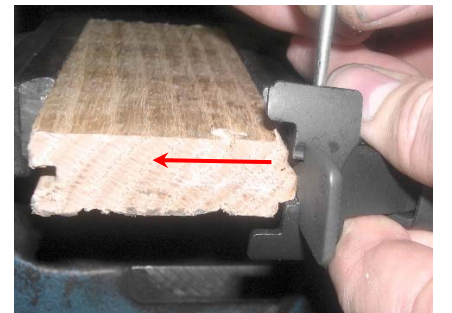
(Alternate Compression Technique) Using tongue of Oak Floor Board
